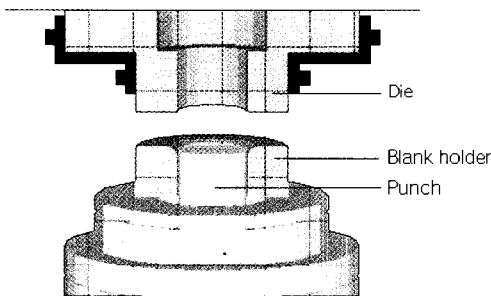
Cross-sectional view of geometric description of the tooling for deep drawing
